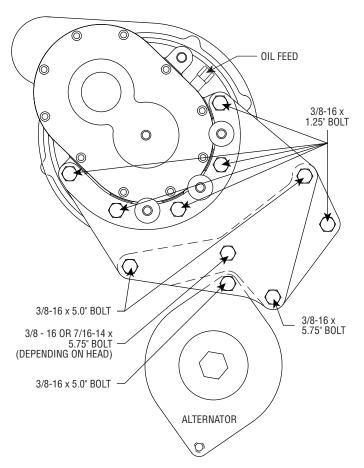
a / Passenger side supercharger mount. (64-68 Mustang)
